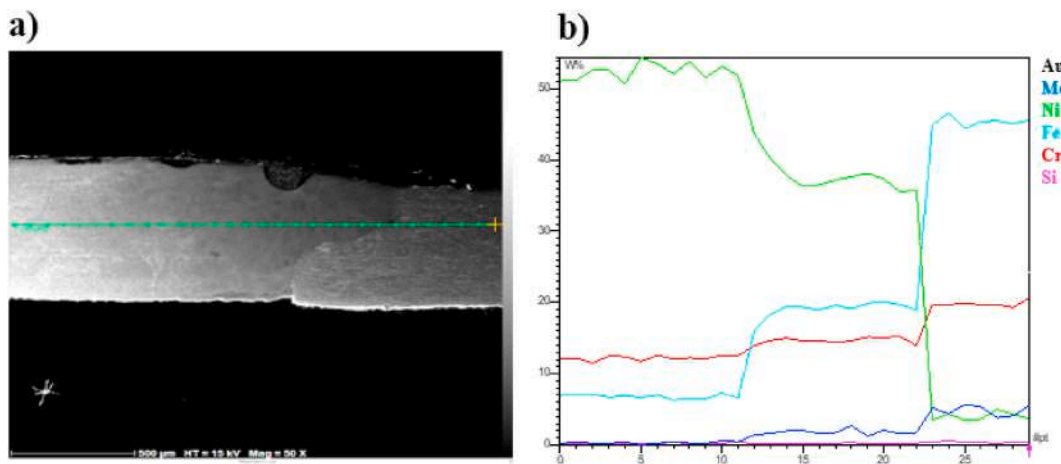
Line scan EDS analysis of weld joint power of 375 W, speed 300 mm/min for a) weld joint, b) weight percentage graph.
